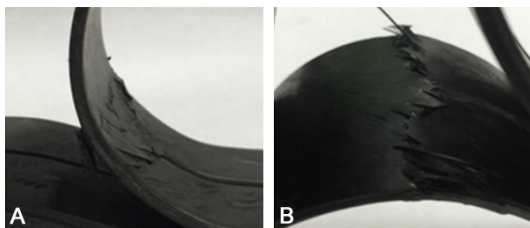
Post-impact fatigue fractures. A: Side view; B: Back view.
